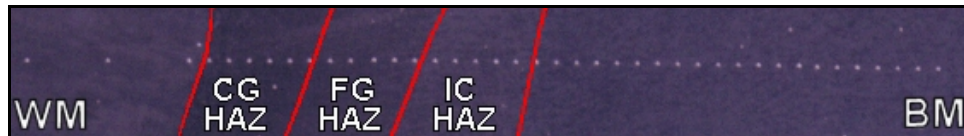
Weld Coupon "II" Hardness Traverse Locations
